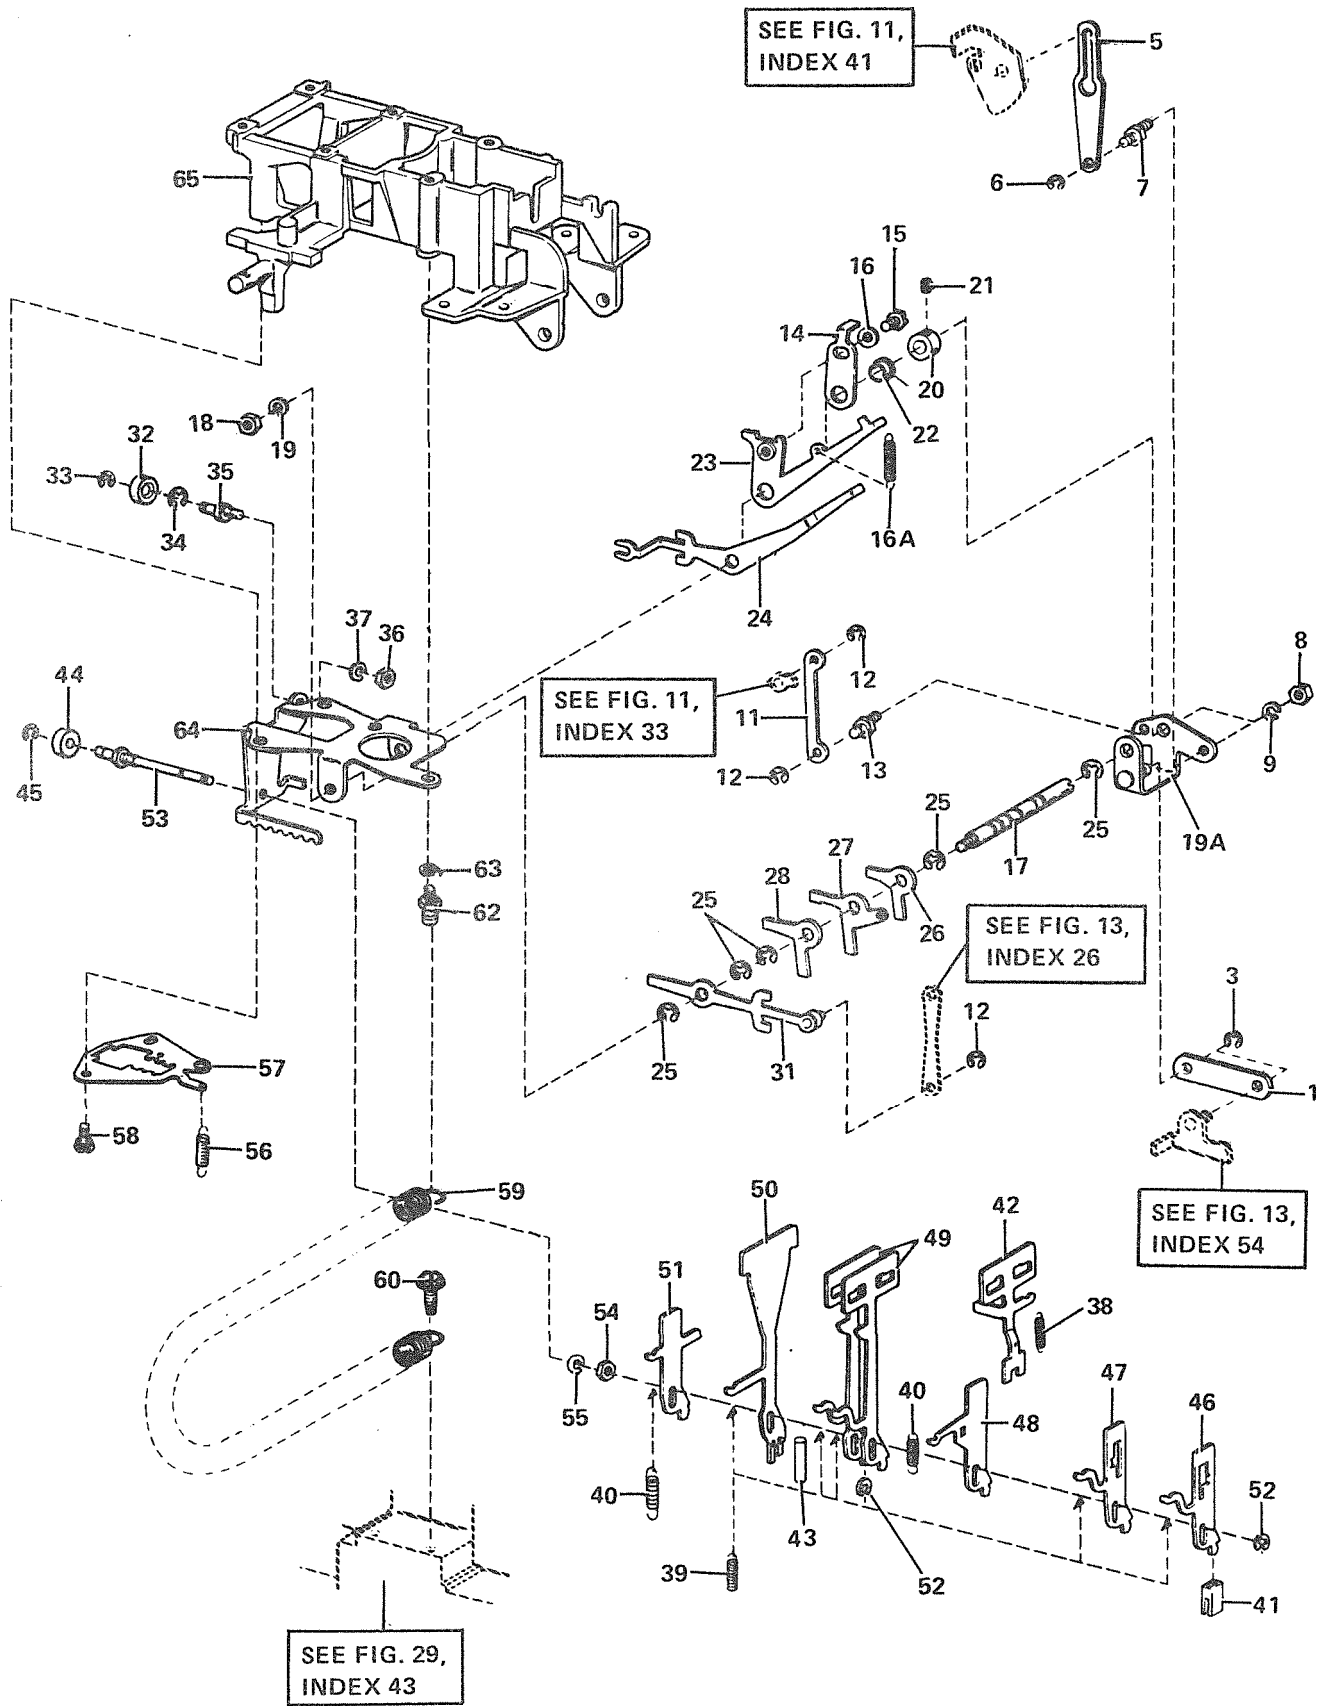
PRINTER-CARRIAGE LOWER PLATE MECHANISM. SEE LIST 12.
